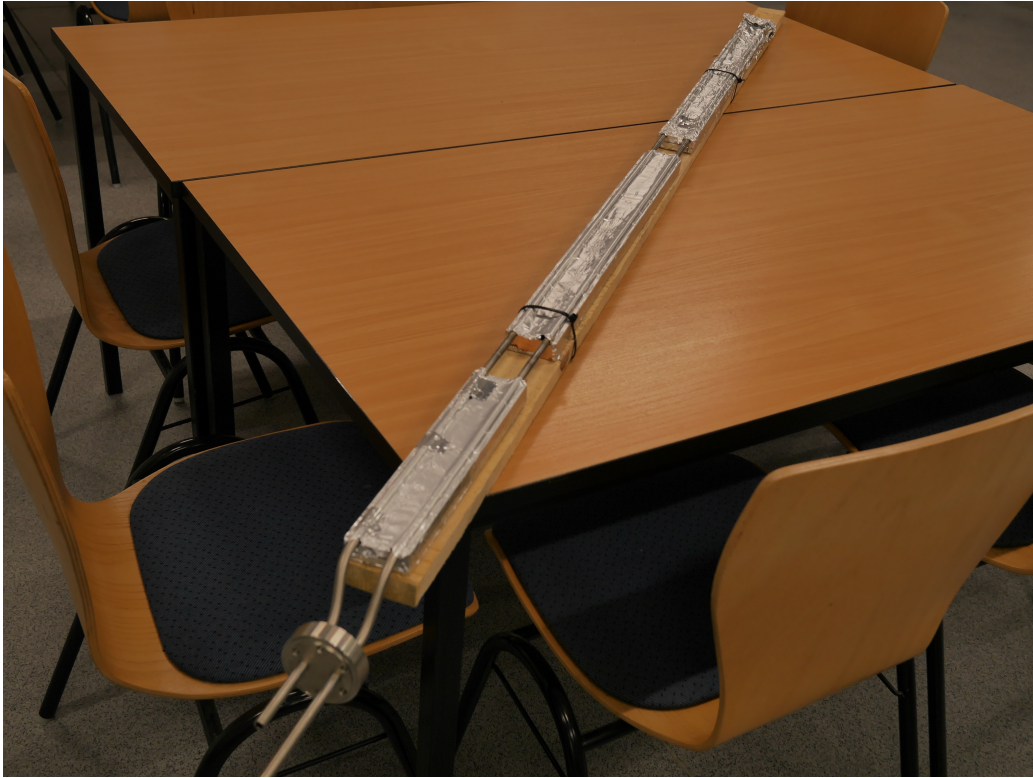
Copper blocks, steel tubes and modified CF50 flange after soldering tubes to blocks and welding tubes together. The assembly is mounted on a piece of wood to avoid transportation damage.
